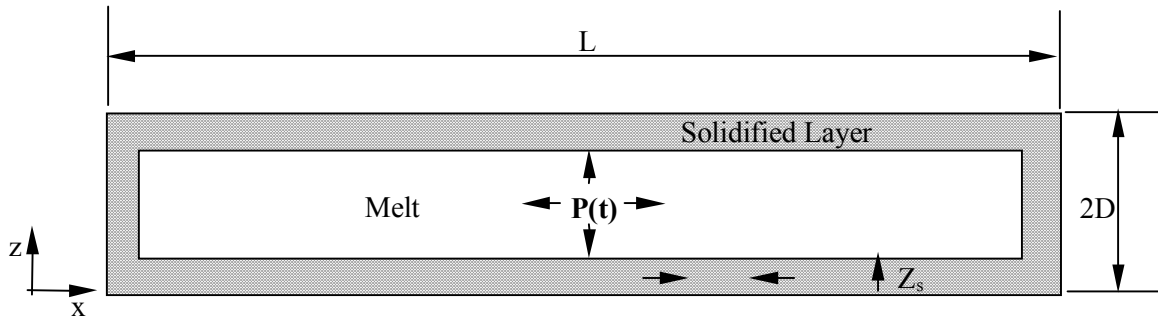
Schematic view of the thermo-mechanical mechanism [77]
